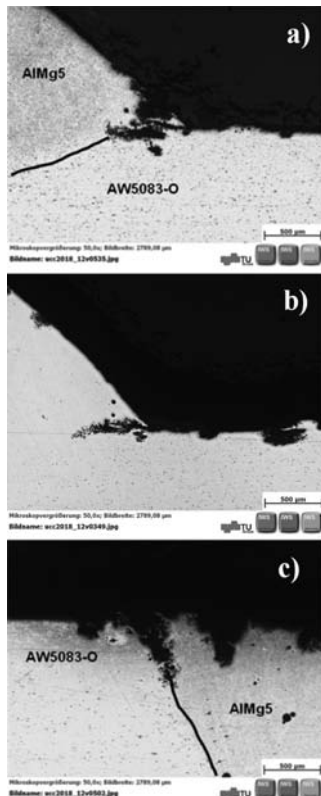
Welded AW5083-O joint cross sections in LOM/corrosion after the FS test: a) 240 h; b) 480 h, lower weld edge; c) 480 h, upper weld edge (see Figure 8)
